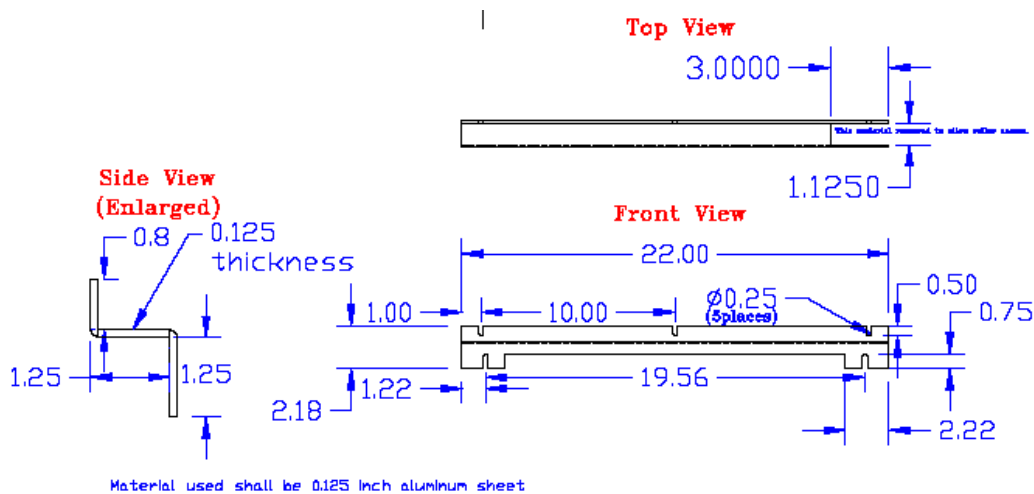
DETAIL C - EIA Angle Rail w/ EIA universal hole spacing
